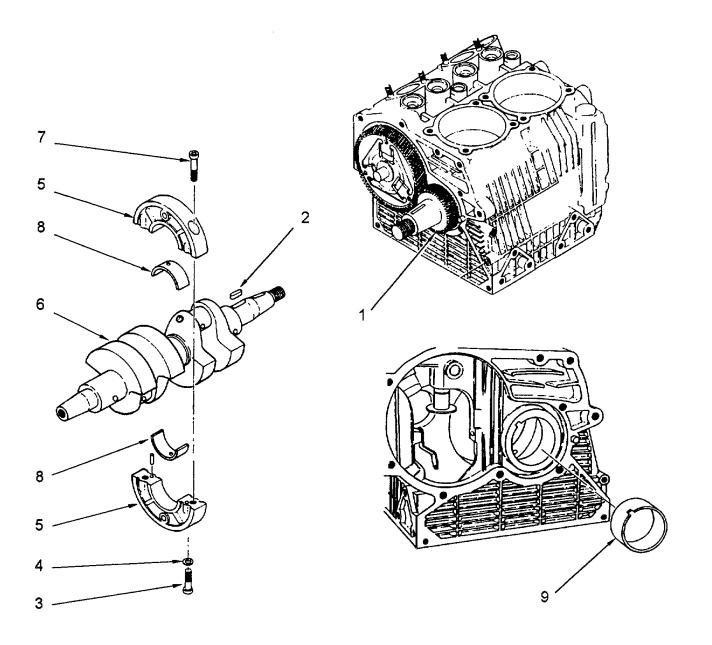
Crankshaft Gear, Crankshaft and Bearings Removal
